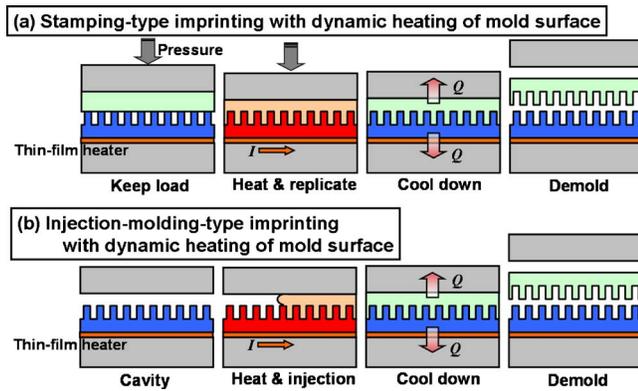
(Color online) Schematics of rapid thermal imprinting by dynamic heating of mold surface: (a) stamping method and (b) injection molding method.
